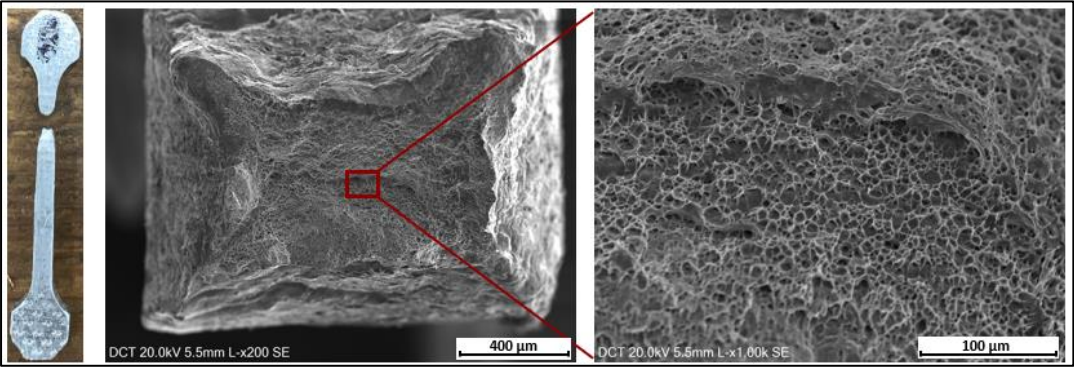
Fracture surface of the sample TP9-1.
